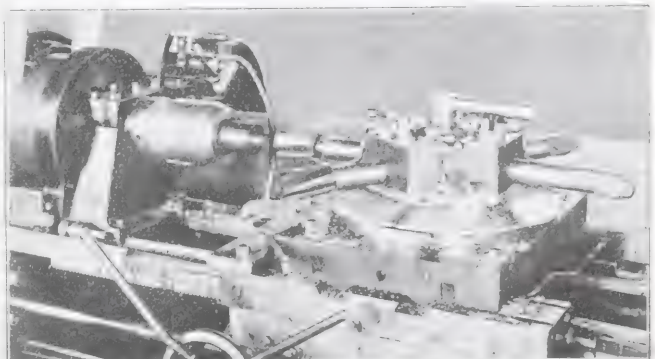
SPECIAL TURRET FITTED TO ENGINE LATHE.
